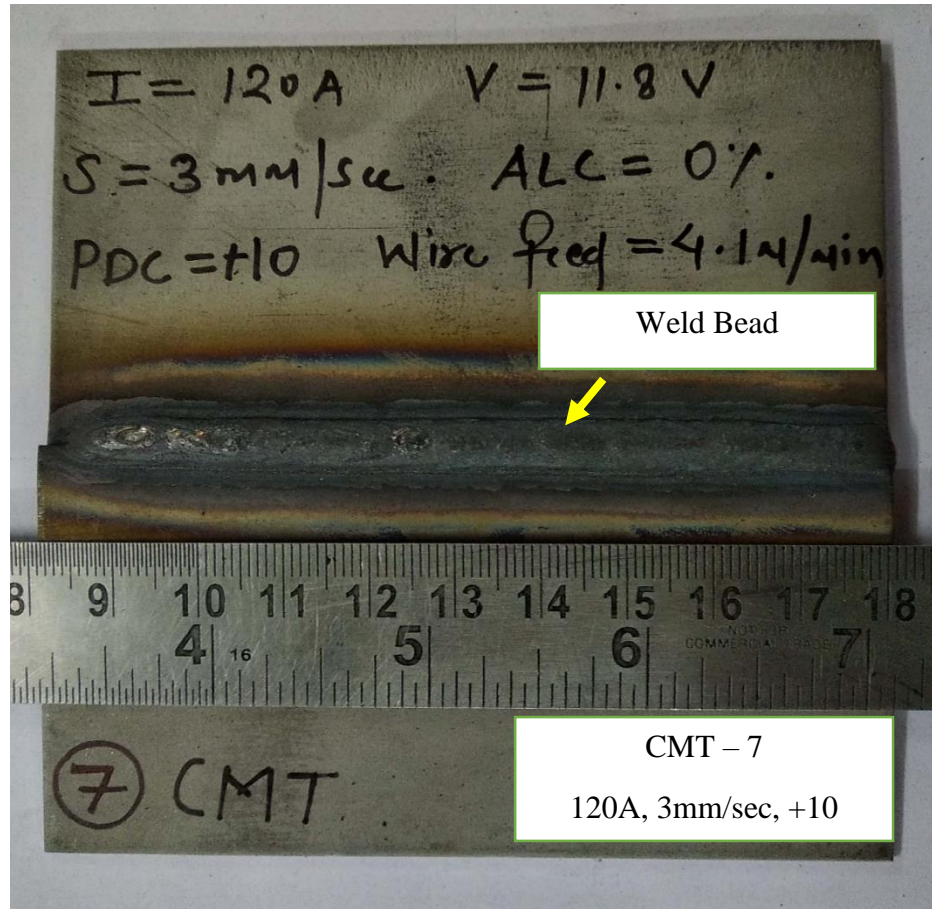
Image of CMT welded SS202 Sample 7 of thickness 1.58 mm
